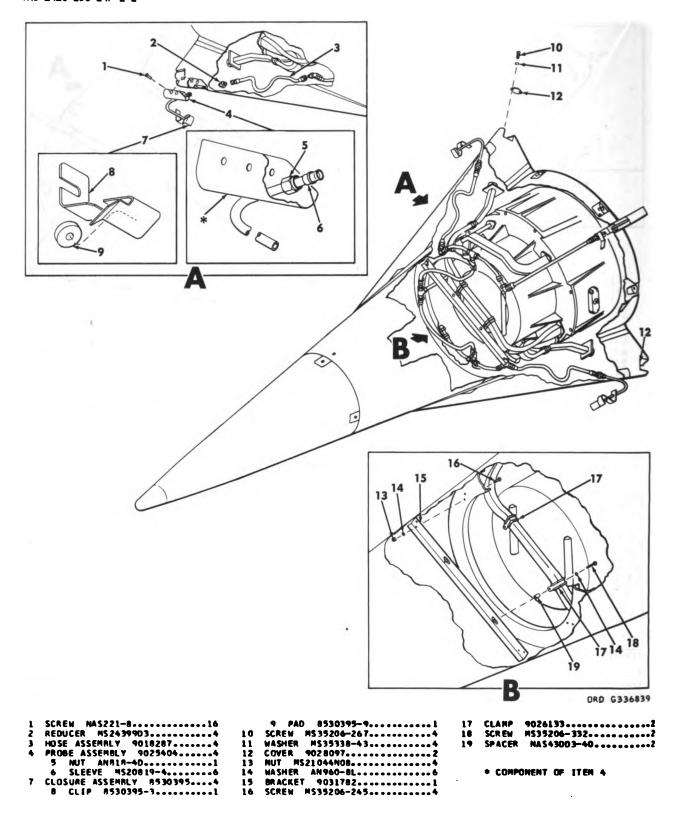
EQUIPMENT INSTALLATION, FORWARD BODY ASSEMBLY /9020575 AND 9979613/
